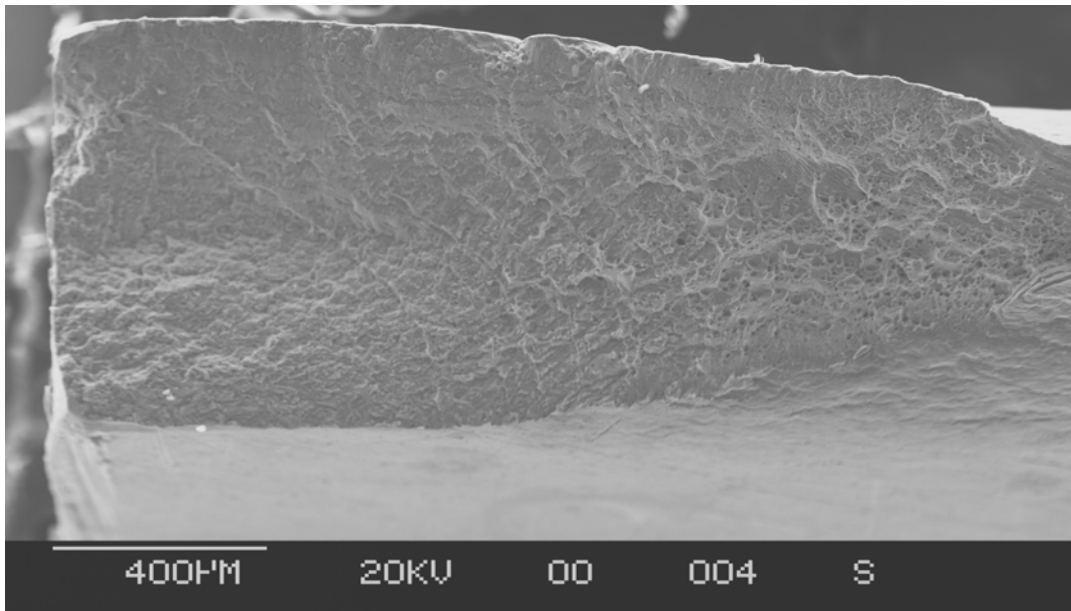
Fatigue Crack on Fracture Surface of Specimen 5710B.
